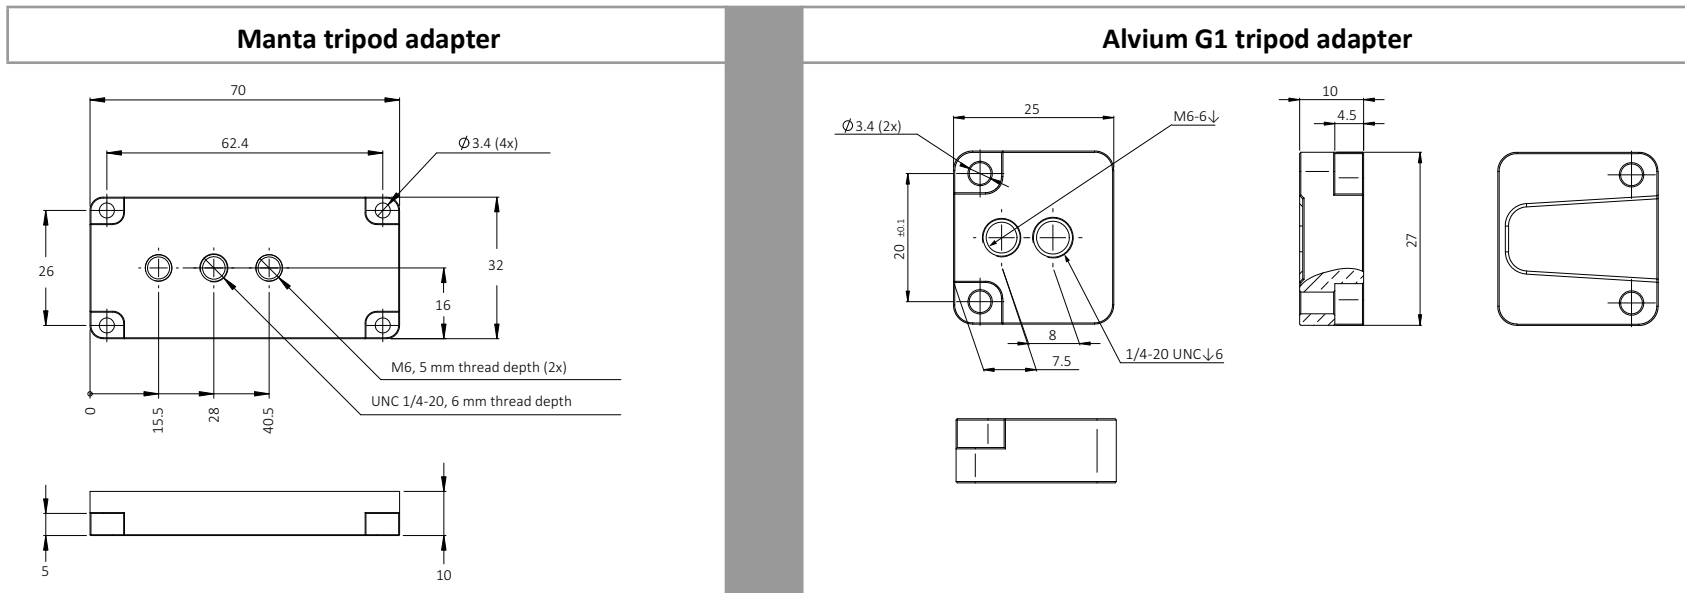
Technical drawings mounting adapters | Manta versus Alvium G1
